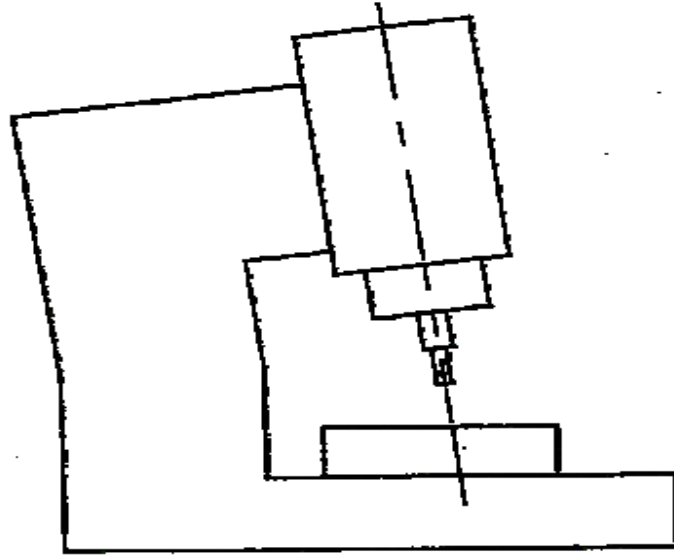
1: Sketch of C shape machine tool with thermal distortion
